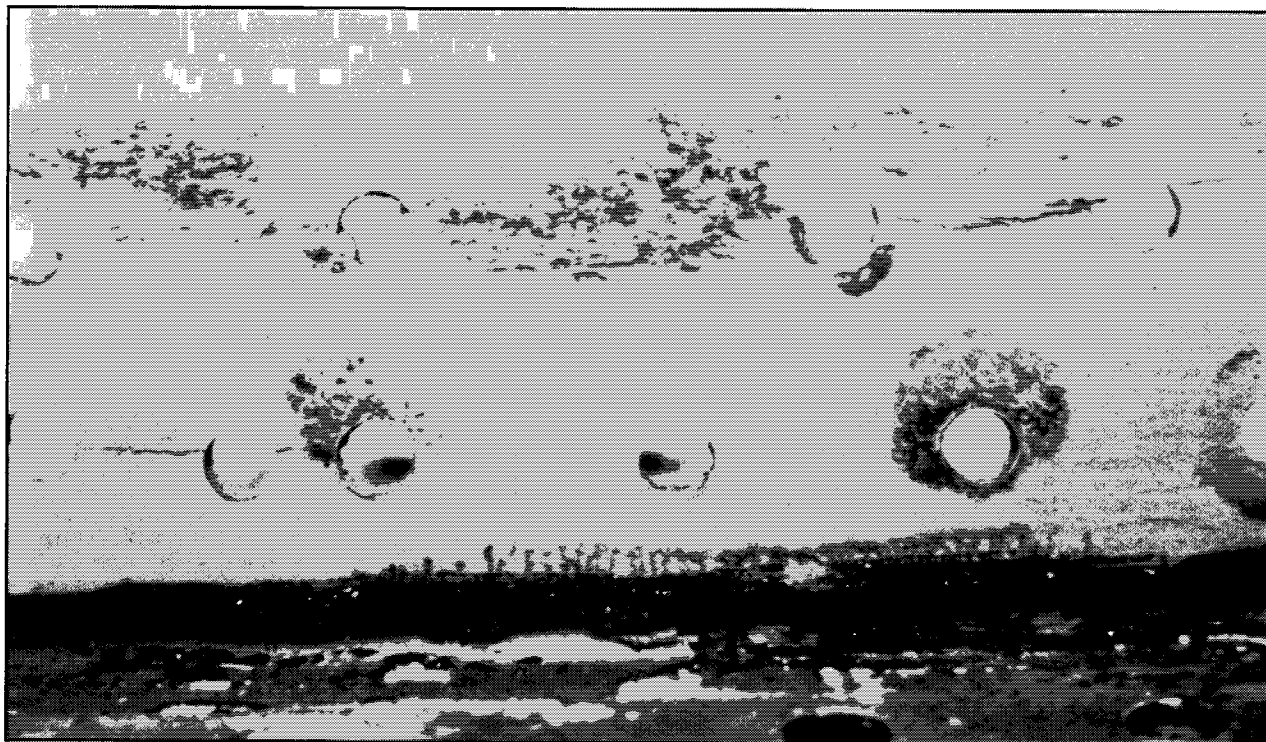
FAYING SURFACE CORROSION ON WING SPAR CHORD WITH CORROSION CRACKING ALSO VISIBLE
